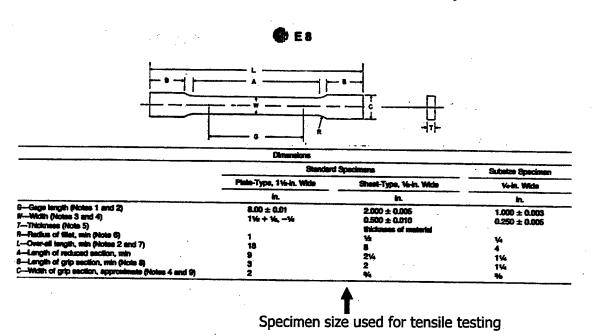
Tensile Specimen Geometry Utilized for Assessing the Tensile Strength of the Aluminum Extrusion (Extracted from ASTM Standard E8 [F1])
